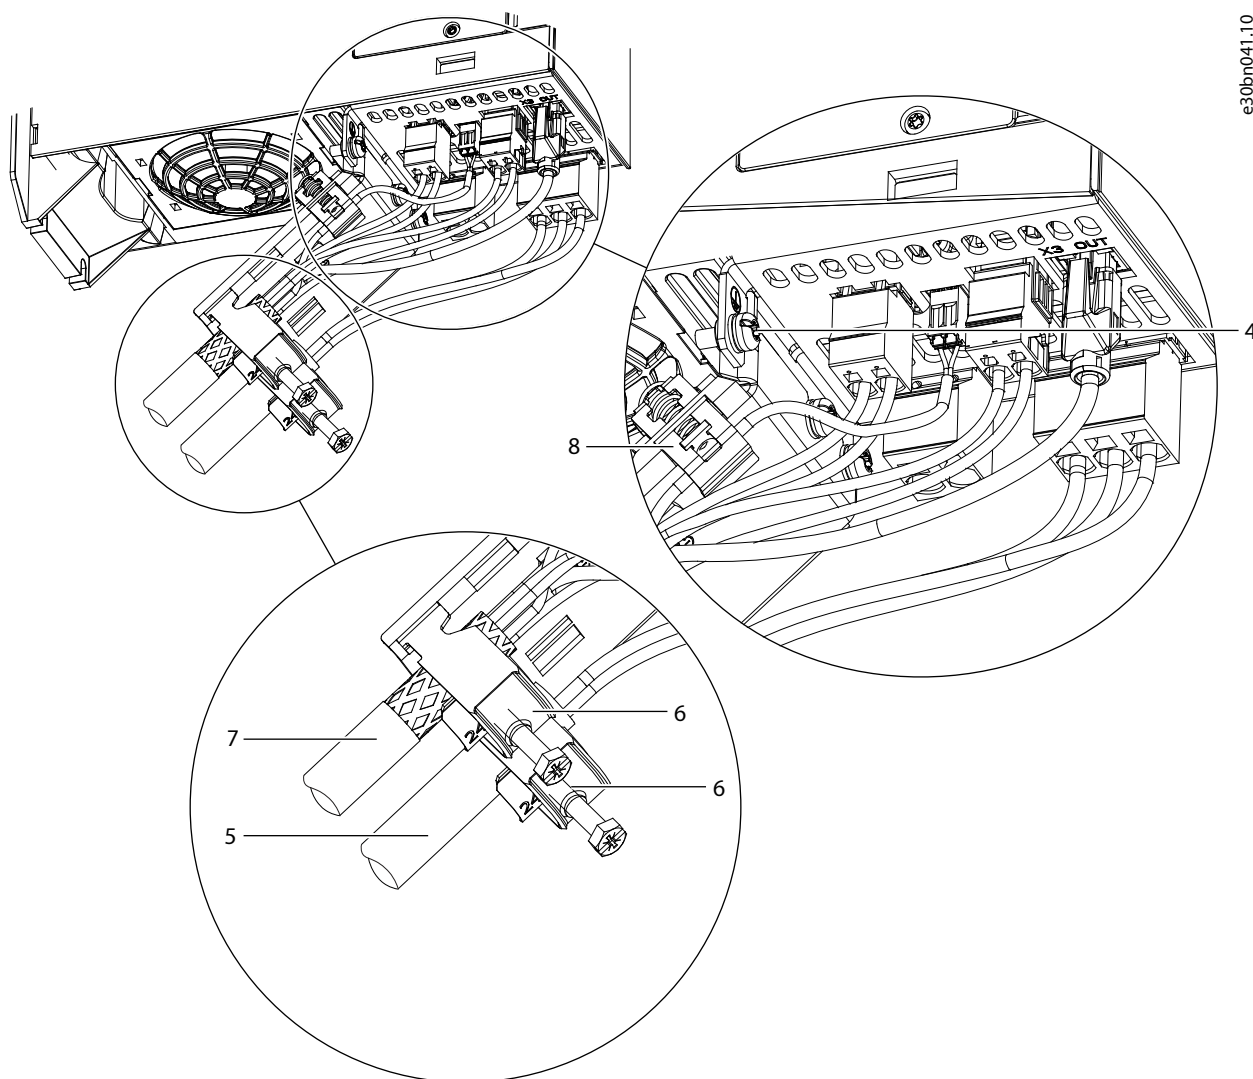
Assembly of EMC Plate and Cable Clamps on the PSM 520 Module
